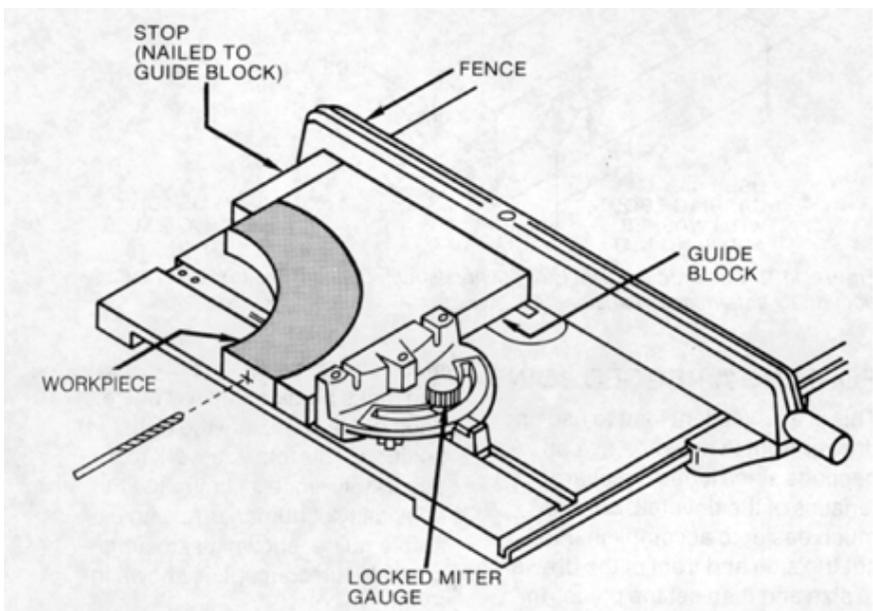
An example of a guide used for boring odd-shaped pieces.
